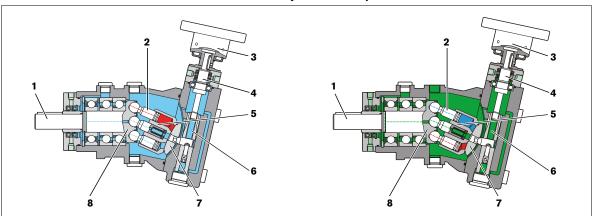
Assembly of the A7VK series 10, left-hand illustration – open design, right-hand illustration – closed design
